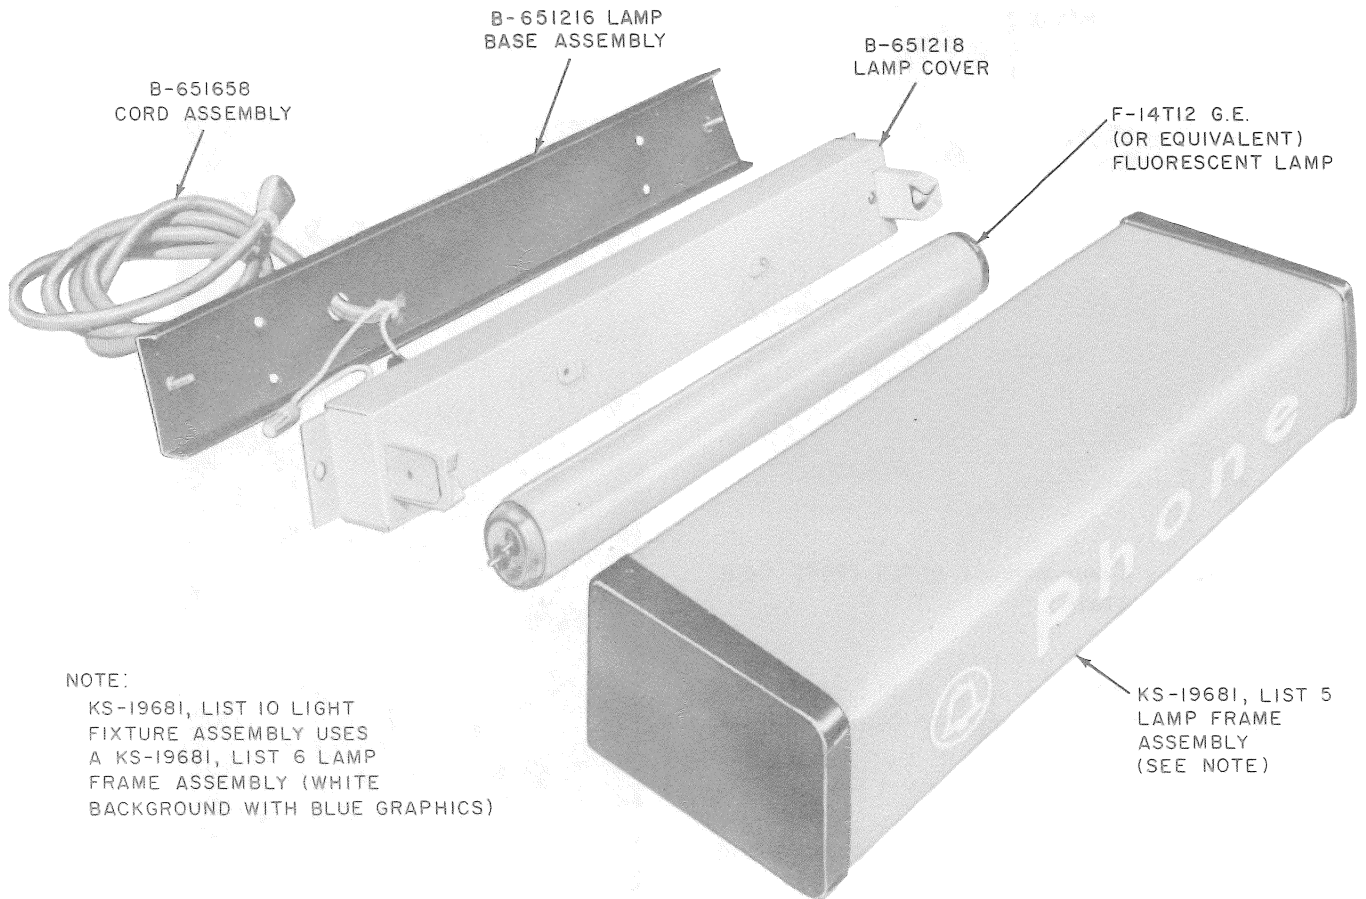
KS-19681, List 9 Light Fixture Assembly
